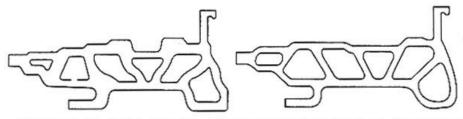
Design for uniform thickness in sections. (Courtesy of Mechanite Metal Corp.)
